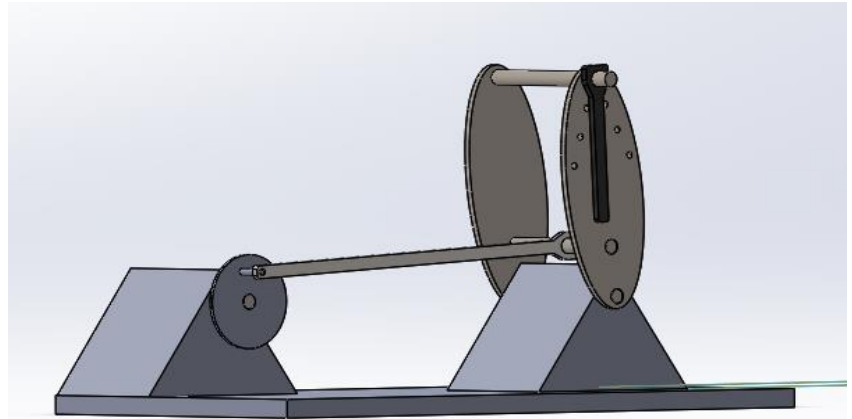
The SolidWorks version of the concept: locomotive. The wheel is connected to a crank and rod. The crank is connected to the oval plates. When the wheel is driving, the crank moves back and forth. The upper rod is connected to a “spring” which slower the movement if pins are connected to the plate.
